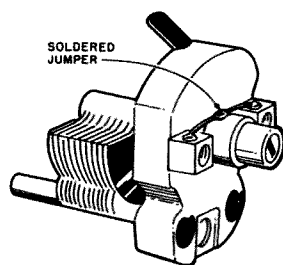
APC type variable capacitor showing shaft housing jumper soldered to mounting studs.
